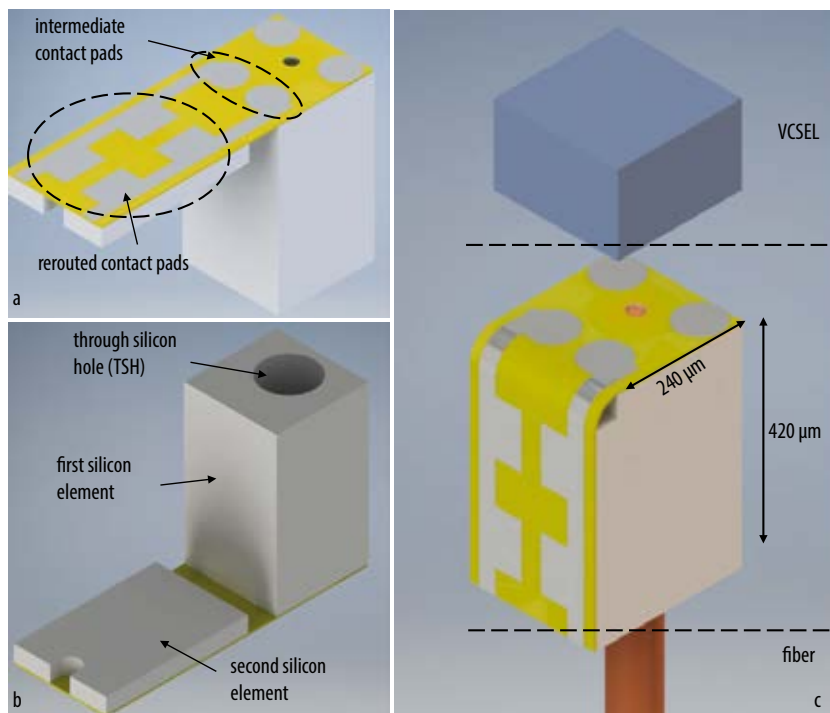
ODLM design: (a) unassembled F2R interposer, (b) rear view of unassembled F2R interposer, (c) assembled F2R interposer with flip-chipped VCSEL and inserted optical fiber
